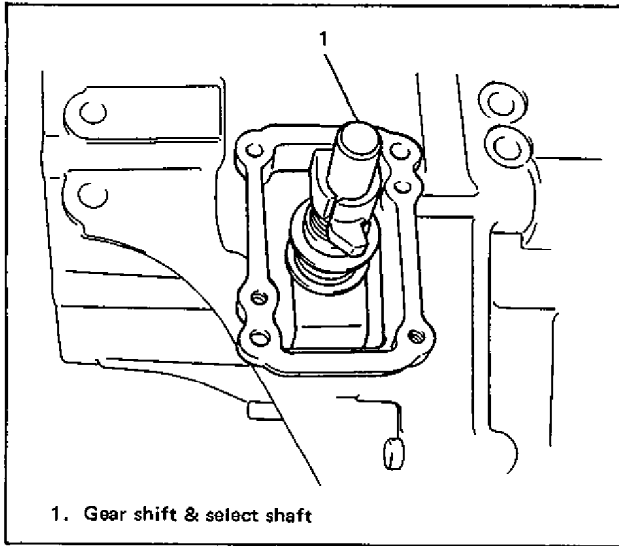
A-31 Removing Shift & Select Shaft Assembly
